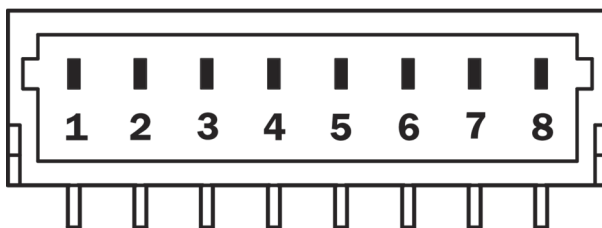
Pin assignment for SICK encoder – view of mating side
